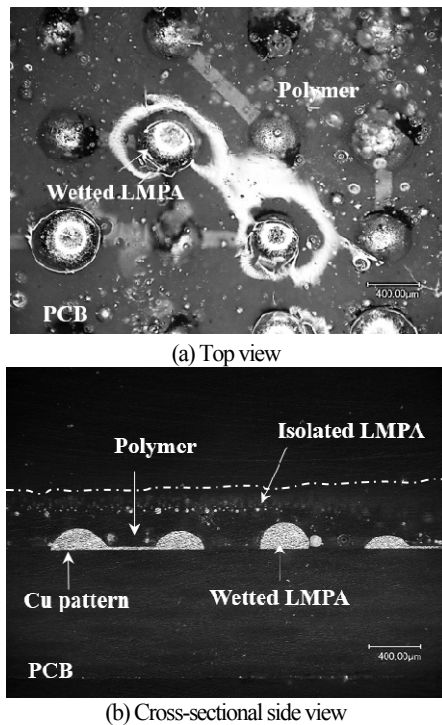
Wetting morphology of LMPA filler on the Cu pattern.
